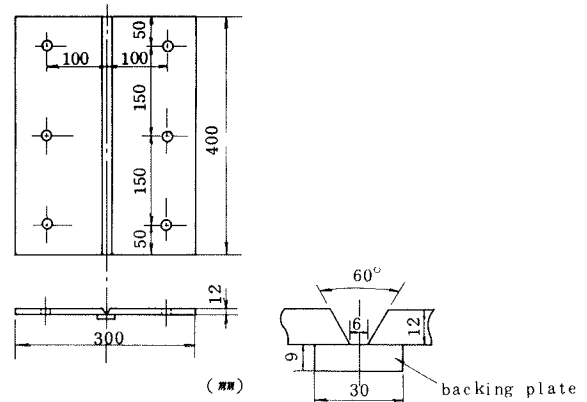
Specimen for test of groove welding under vibration.
